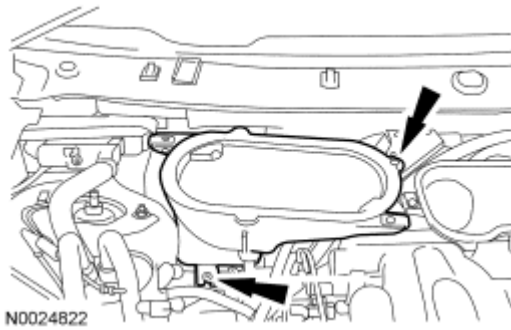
Locating Fresh Air Inlet Duct Nuts
